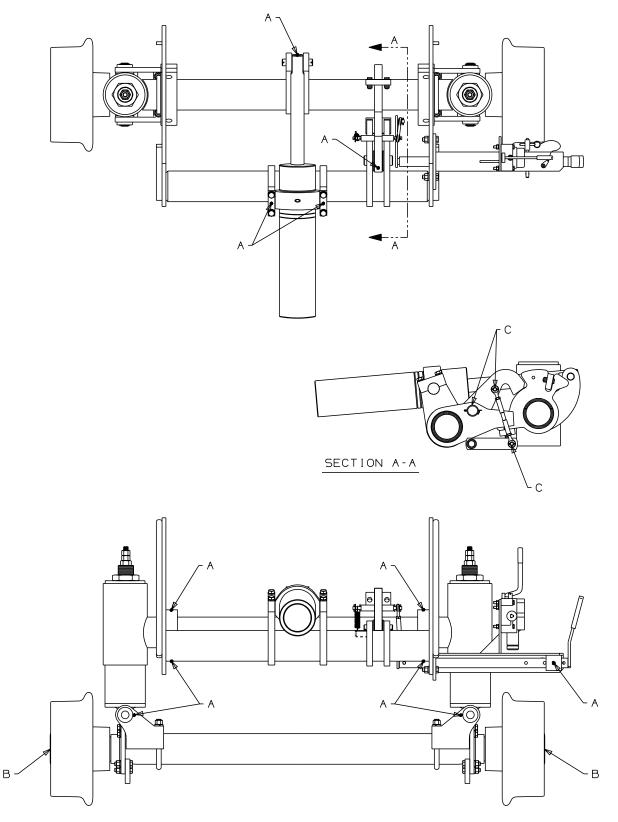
FRONT GUIDE WHEEL UNIT LUBRICATION
